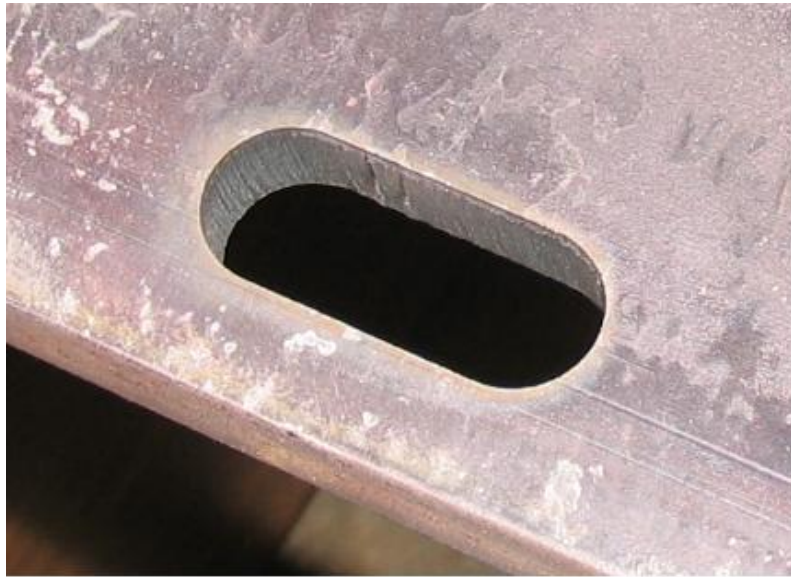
Typical full size oxy acetylene slotted hole
